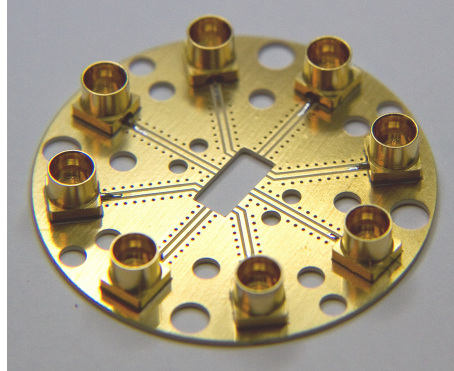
Connectorized PCB. Microwave board with a 35 mm diameter used for the packaging of the 3 mm x 7 mm diced samples. It is made from a microwave Rogers TMM10i substrate, with 500 μm thickness, and is metalized on both side with 1 oz. electroplated copper which was then gold plated. 8 SMP connectors are soldered to the 50 Ω coplanar waveguides.
